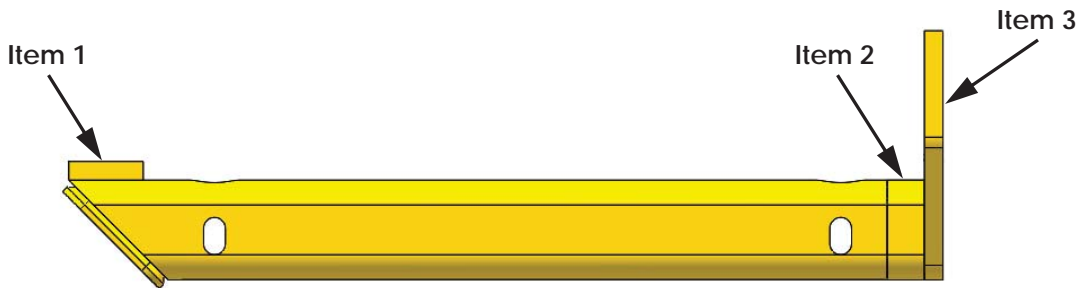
Modified limit switch guard Canrig P/N: DT22650
